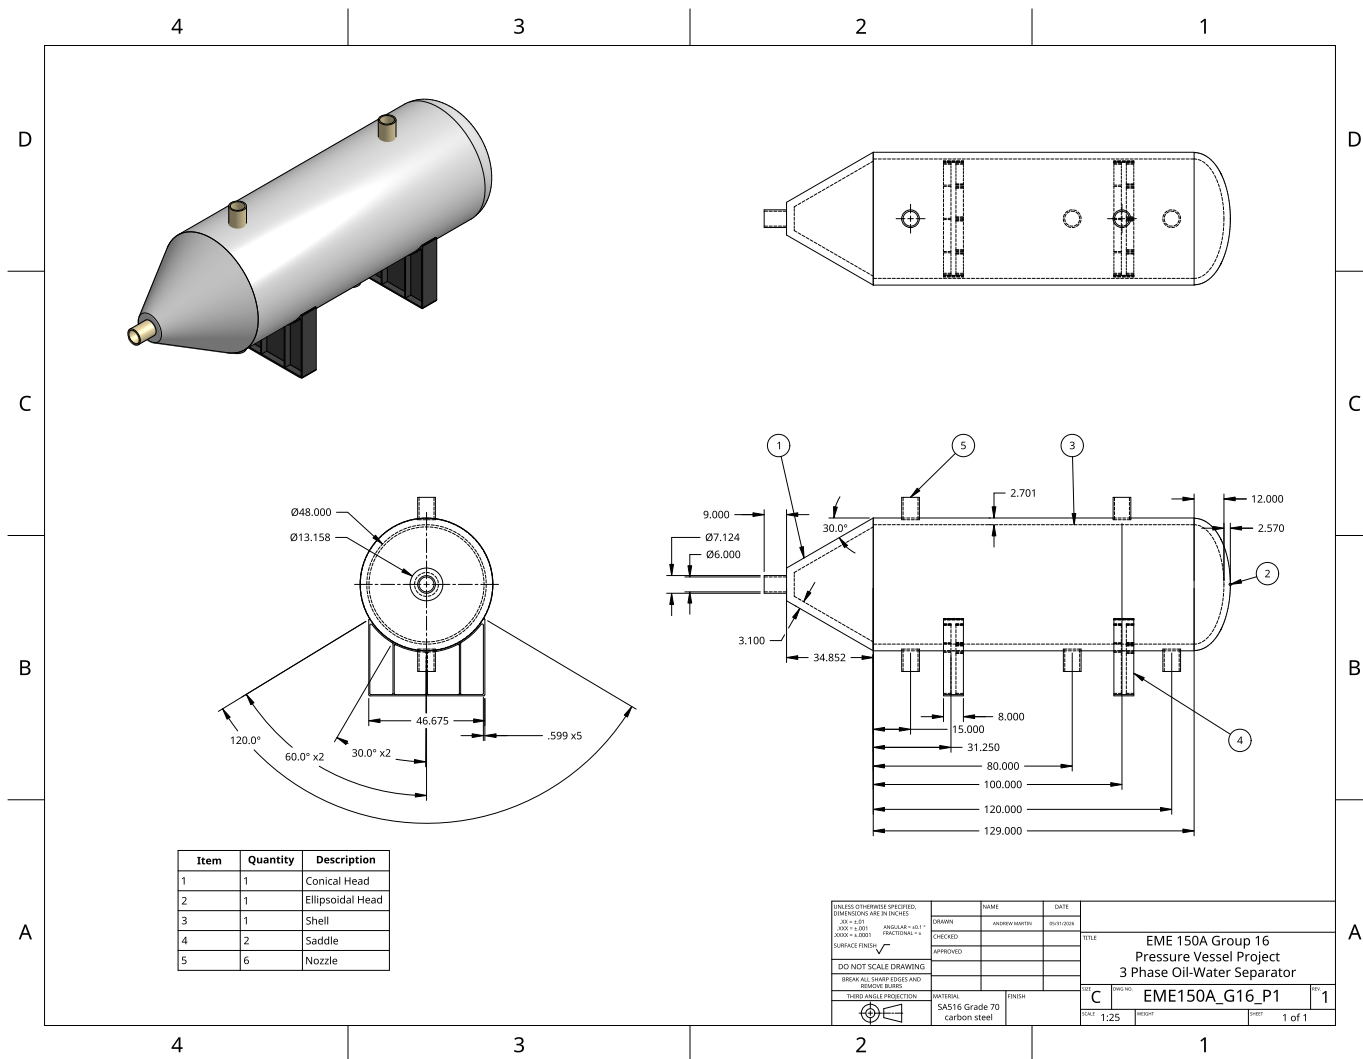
Detailed drafting sheet for the horizontal pressure vessel assembly.
